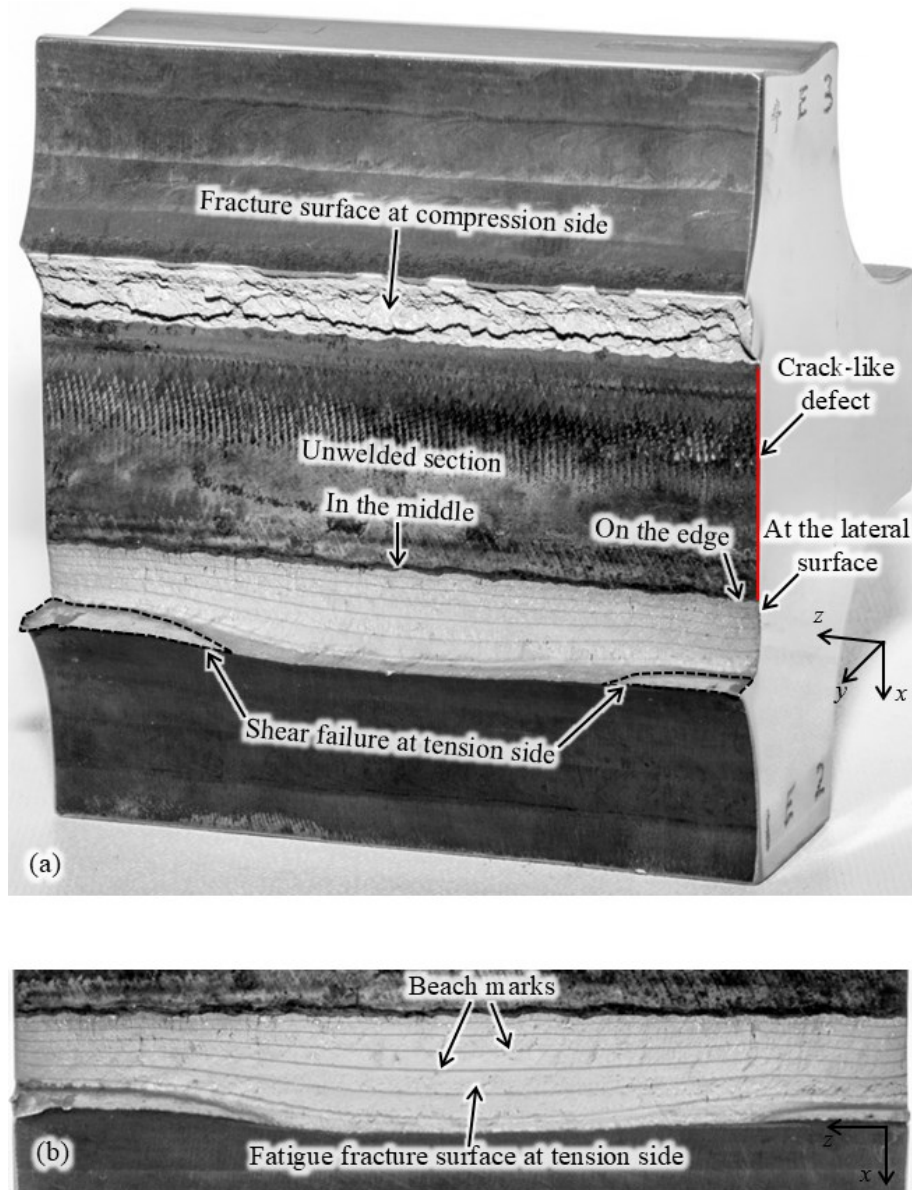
(a) Broken welded joint after final fracture and (b) experimental fatigue beach marks created during crack propagation
